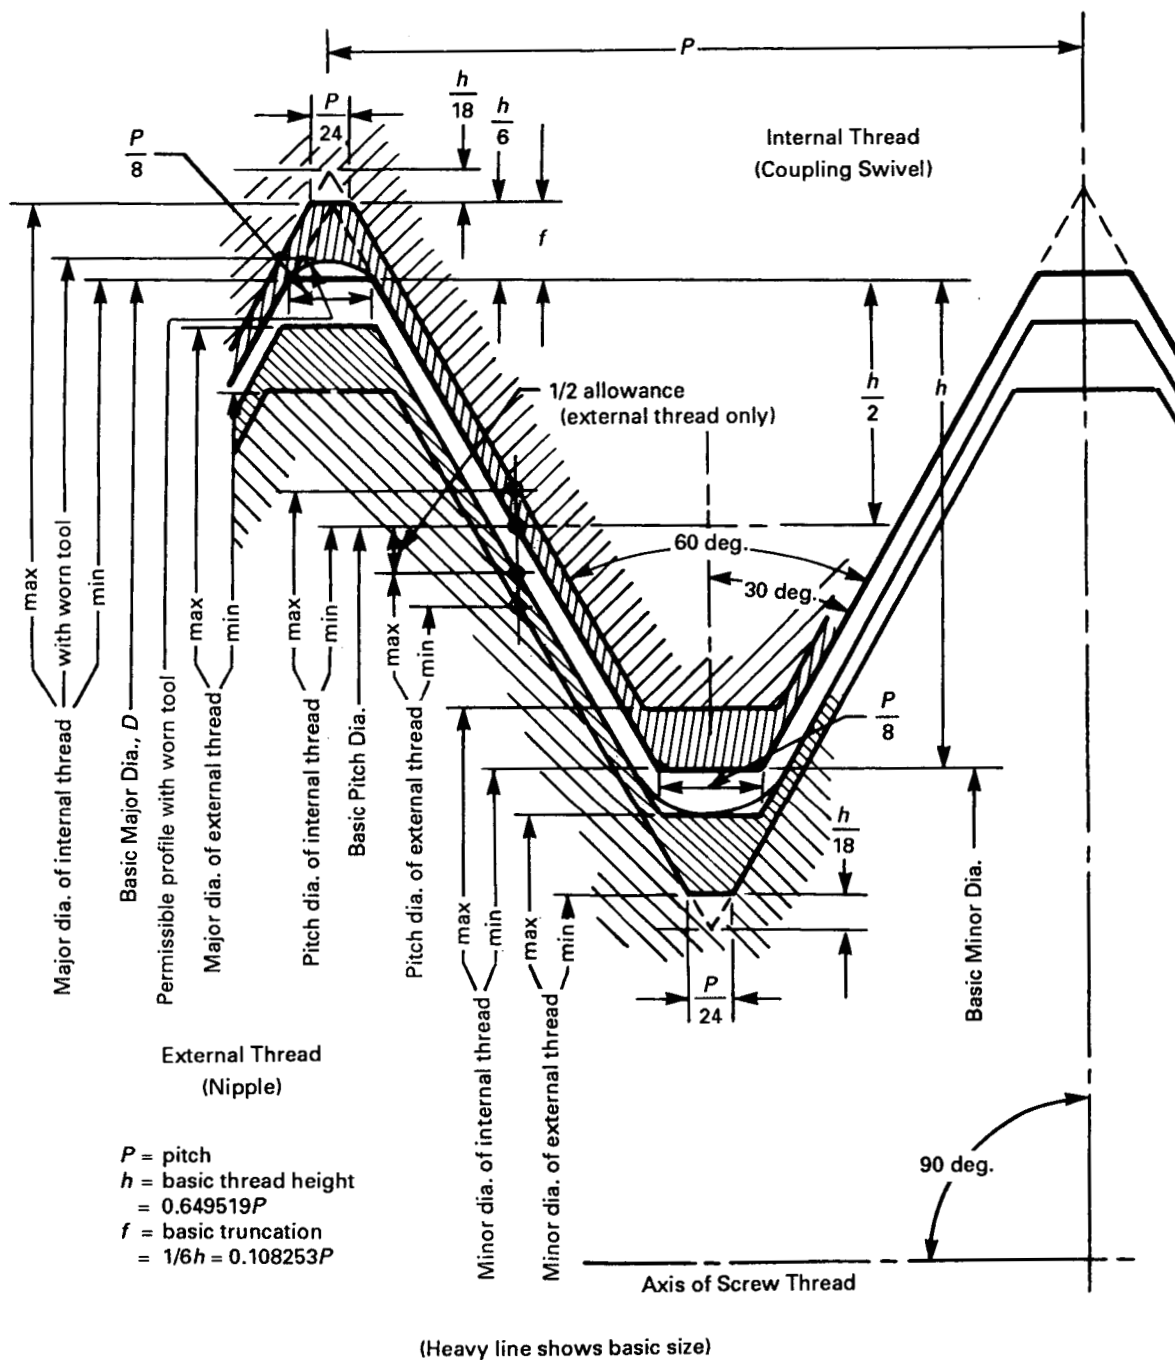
THREAD FORM FOR AMERICAN NATIONAL STANDARD HOSE COUPLING THREADS, NPSH, NH, AND NHR
